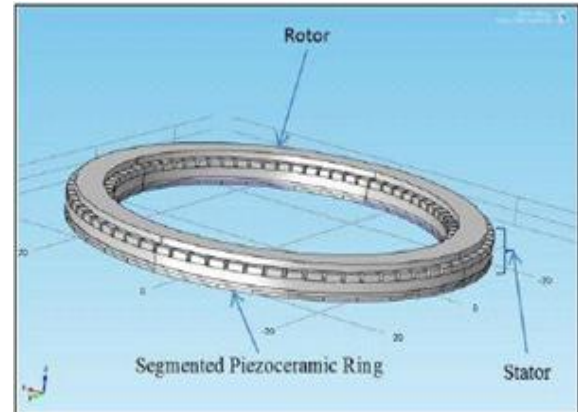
Hollow ring type Piezoelectric ultrasonic motor depicting stator and the rotor. Designed in COMSOL Multiphysics 5.3 tool
